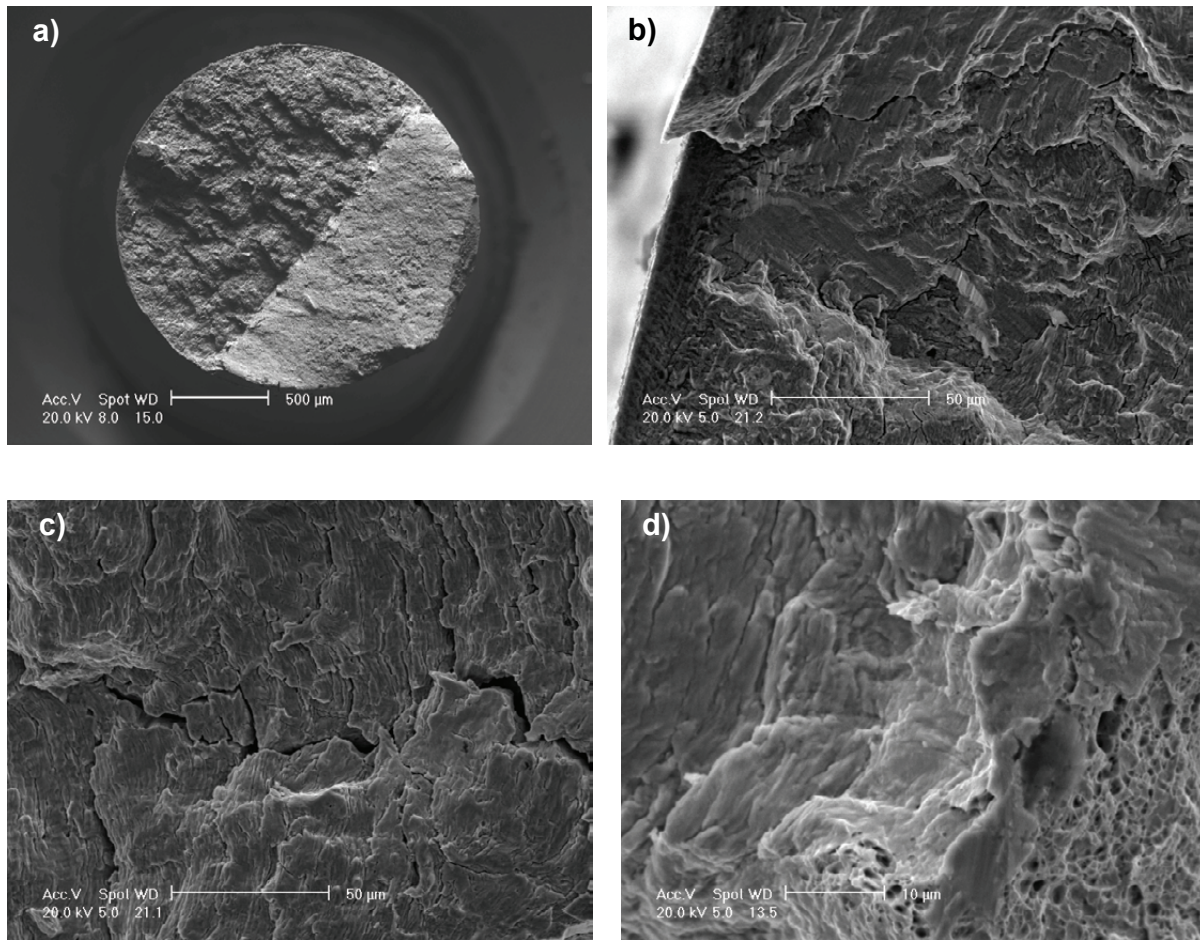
SEM micrographs of E2 12 (71 dpa/334 °C) after LCF test at $\Delta\epsilon_{tot} = 0.9\%$ at 330 °C: a) an overall view; b) fracture appearances close to the specimen surface; c) fracture appearances in the middle area of the fatigue crack propagation; d) fracture appearances close to the end the fatigue crack propagation.
